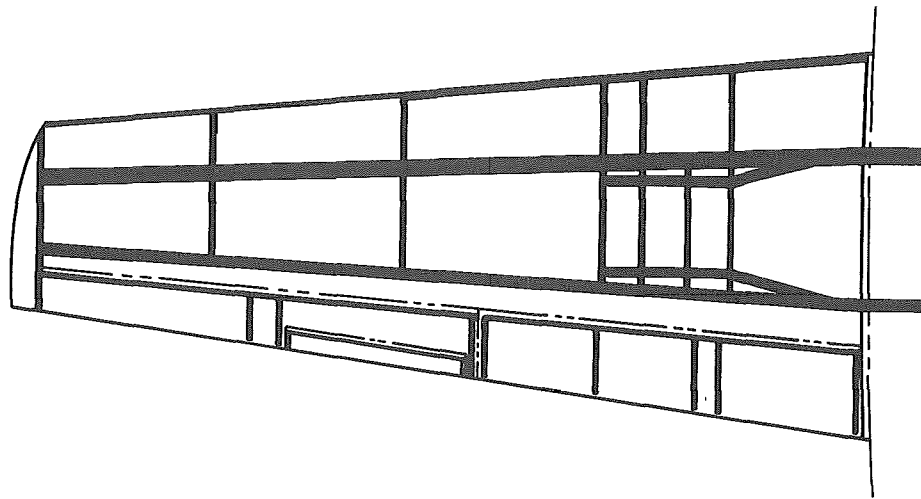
PLAN VIEW OF WING STRUCTURE
